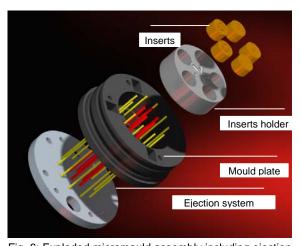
Exploded micromould assembly including ejection system, insert holder and five inserts
